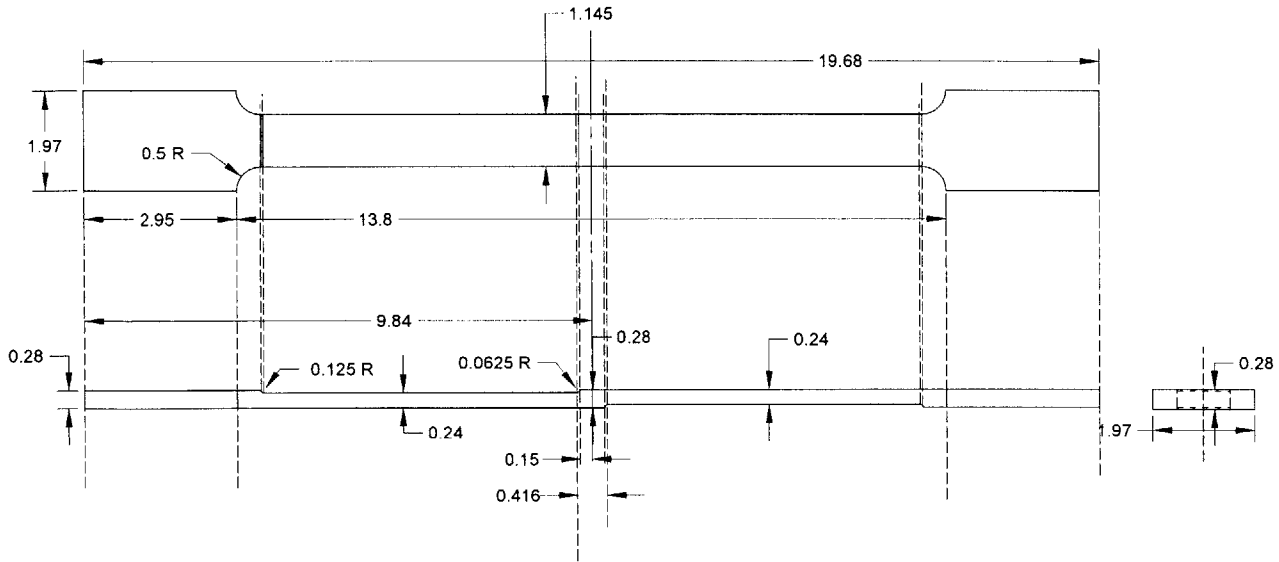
16.7% offset test specimen drawing (dimensions in inches).
